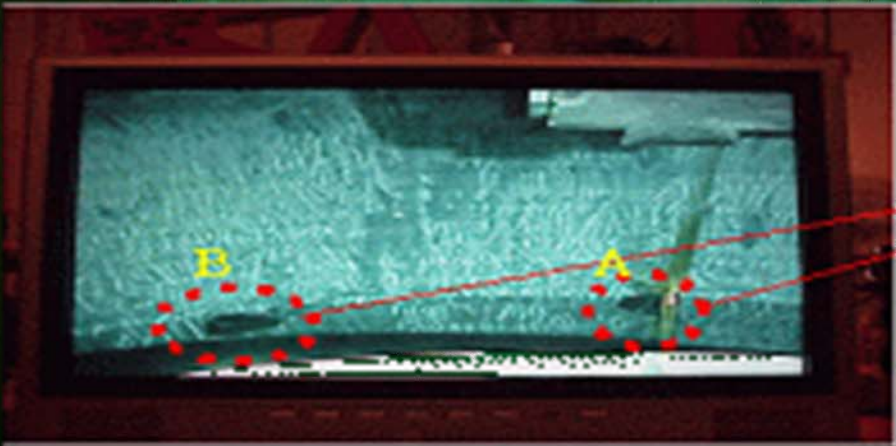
The Photography for Bottom header defected at Rx Vessel
